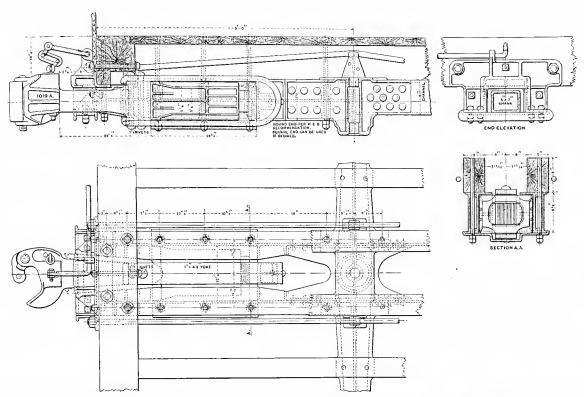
Gould Friction Draft Gear Applied to Freight Car with Cast Steel Body Bolster. Gould Coupler Company.
